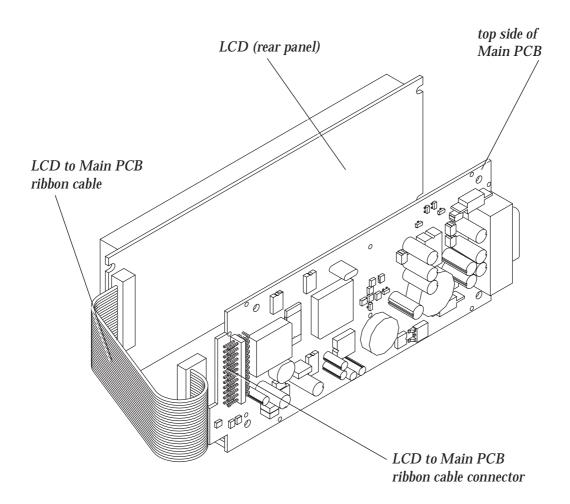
Disconnecting the LCD to Main PCB Ribbon Cable
